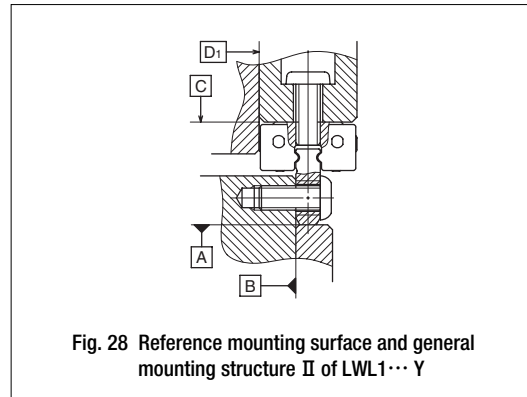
Reference mounting surface and general mounting structure II of LWL1...Y
